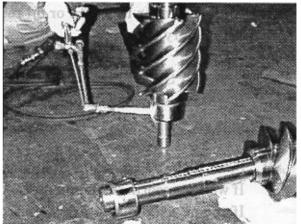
Drawing out the Radial Bearing Inner ring
